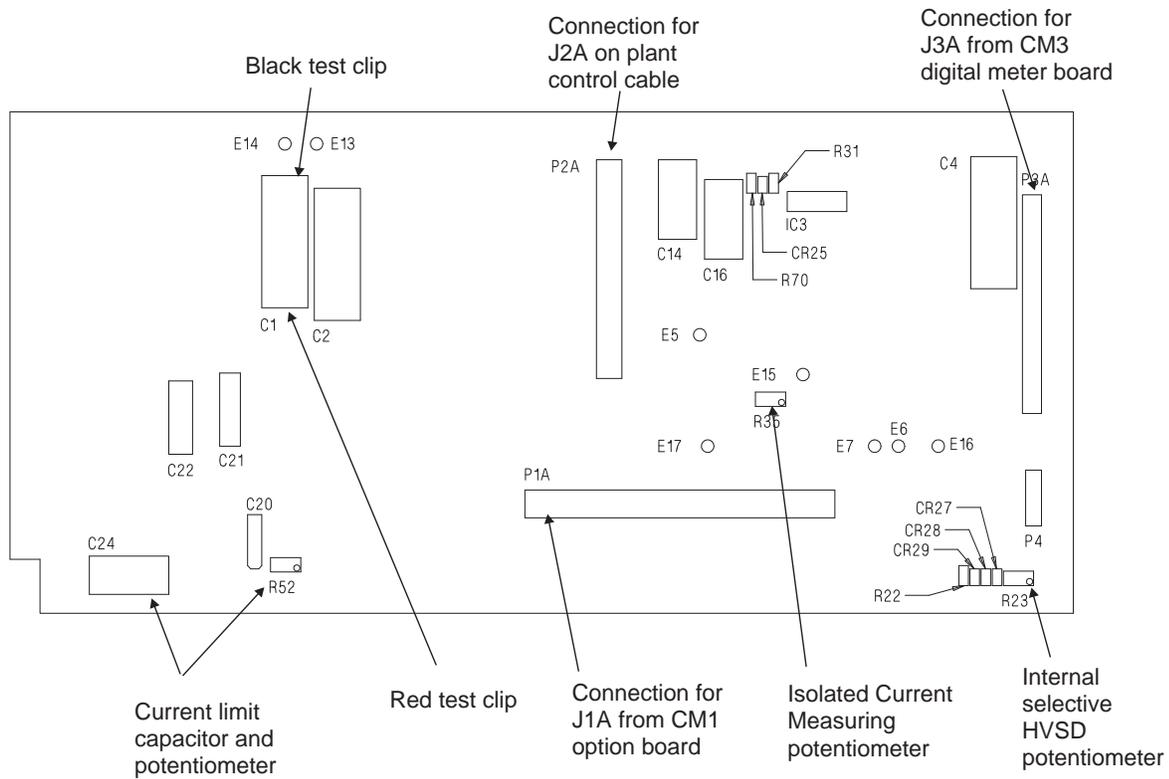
CM2 Control Board Showing Test Clip Connections and Other Component Detail
